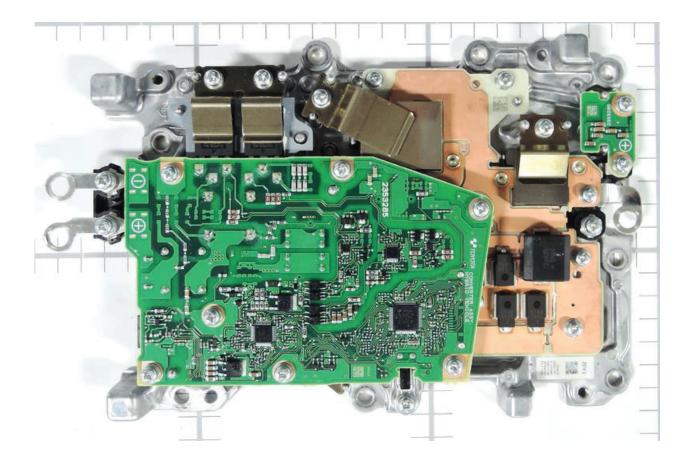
Toyota DC/DC Buck Converter Assembled to Enclosure
